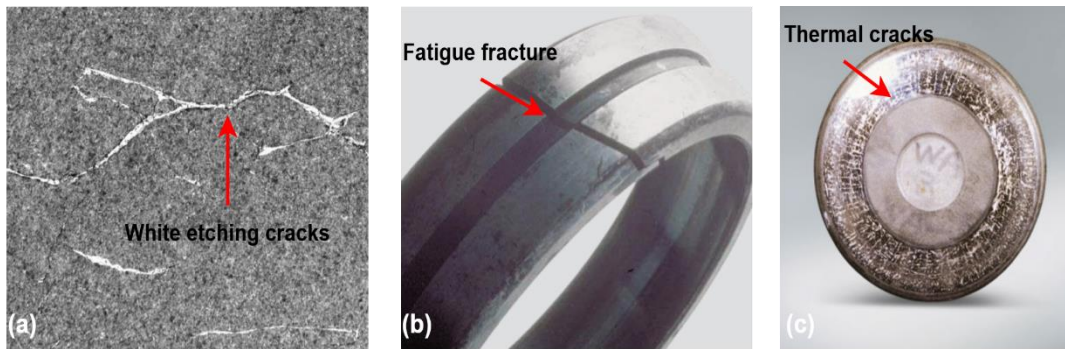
bearing cracks and fractures modes, (a) Bearing WECs in wind turbine gearbox, (b) fatigue fracture of an outer ring, (c) Thermal cracks occur at roller large face.
